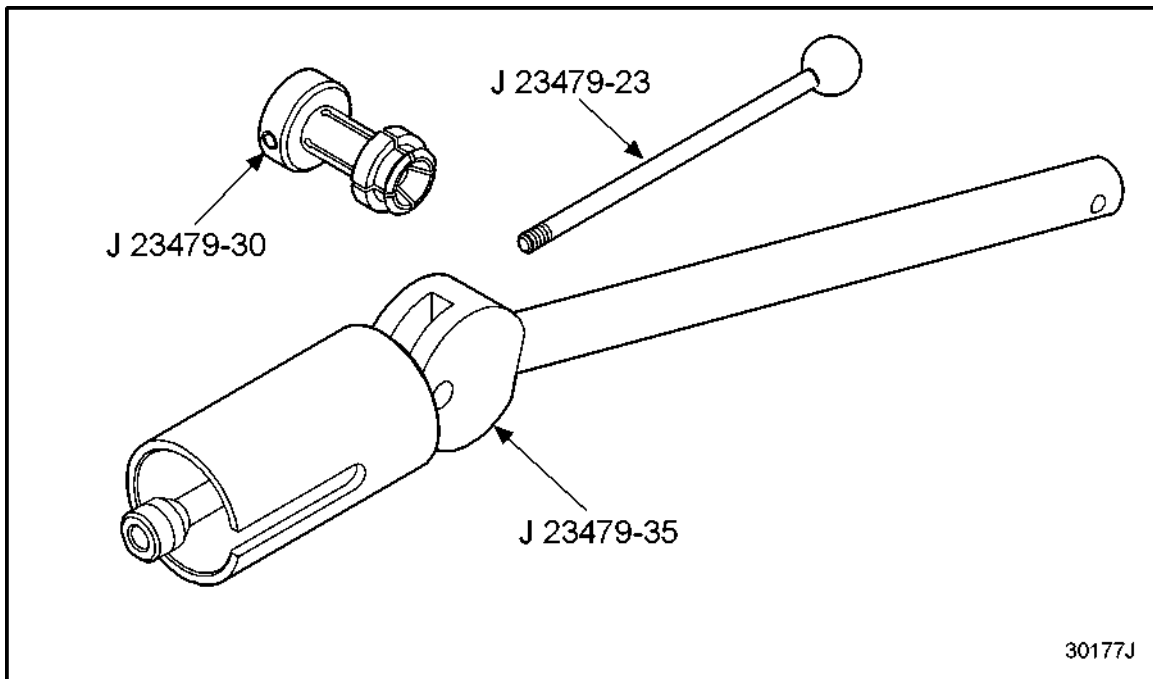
Valve Seat Insert Remover (4 Valv), J 23479-471
